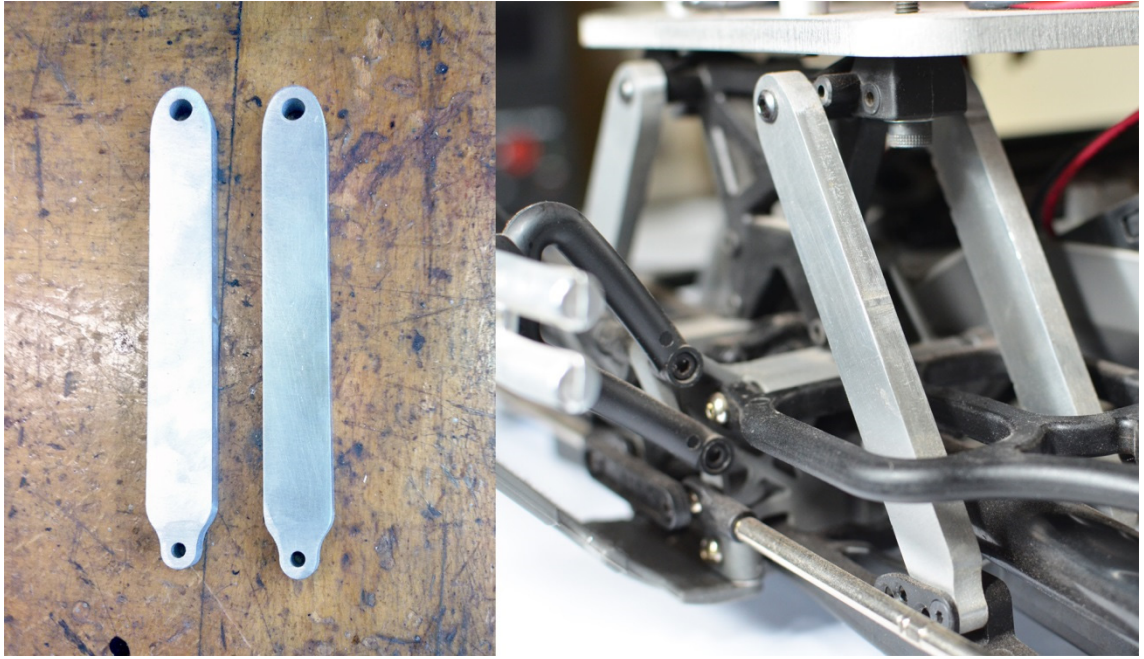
Custom suspension locks. These aluminium parts were designed using CAD software and manufactured using water-jet cutting technology before being installed on the original mounts.
